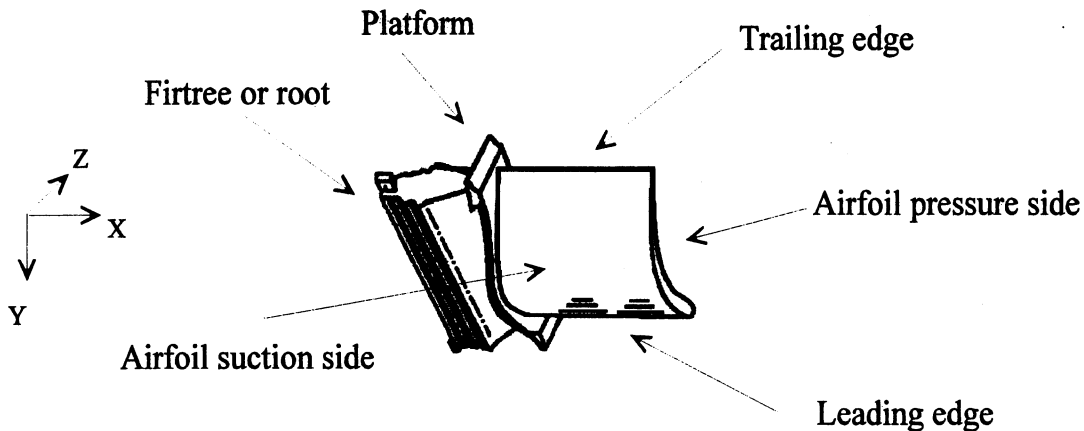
Drawing of the Physical Turbopump Blade
